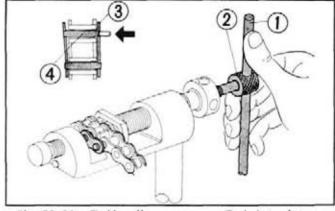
① Handlever ③ Joint plate ② Pressure bolt B ④ Joint pin
